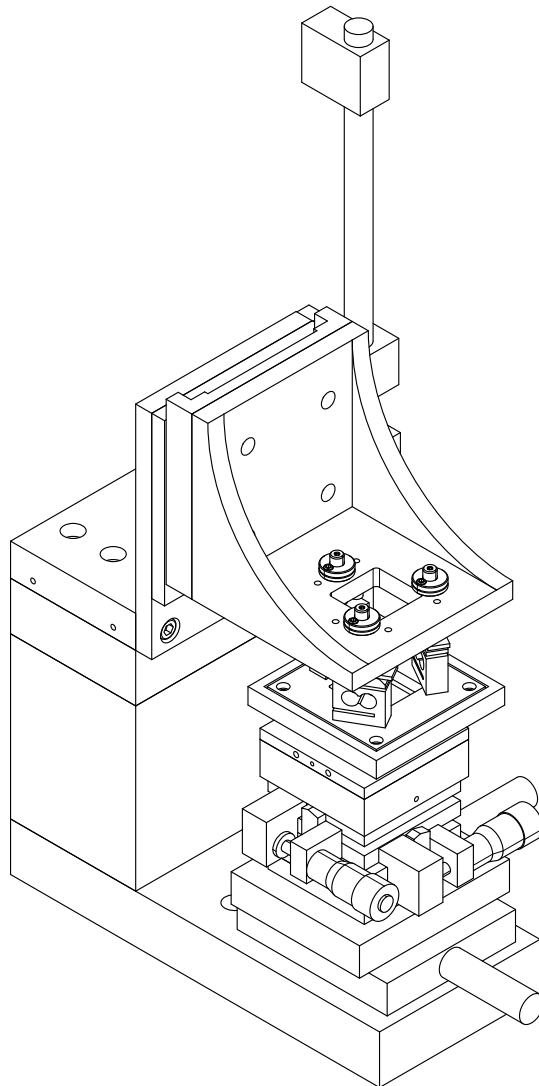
The printing tool equipped with a force-sensing carrier holder.
